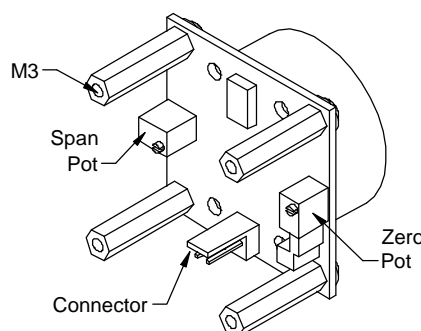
Mounting pillar configuration for attaching to the base of an enclosure.
